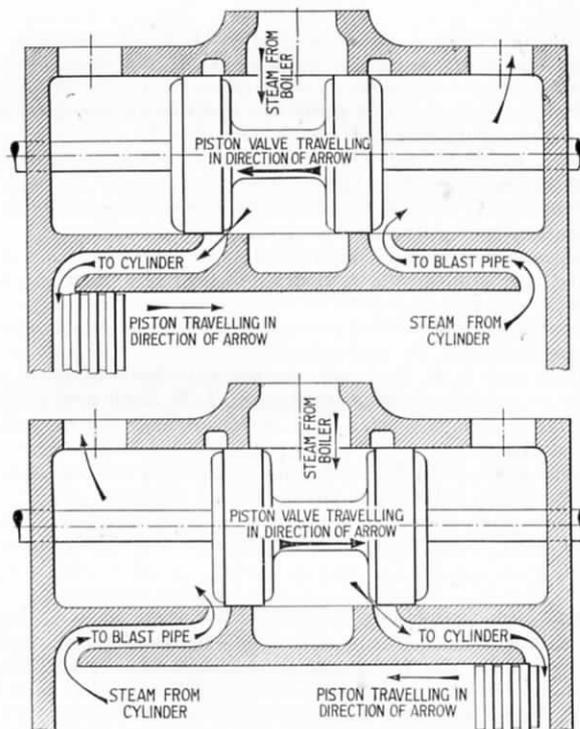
RELATIVE POSITIONS OF STEAMING AND EXHAUSTING EDGES; INSIDE ADMISSION PISTON VALVES AND PORTS.
